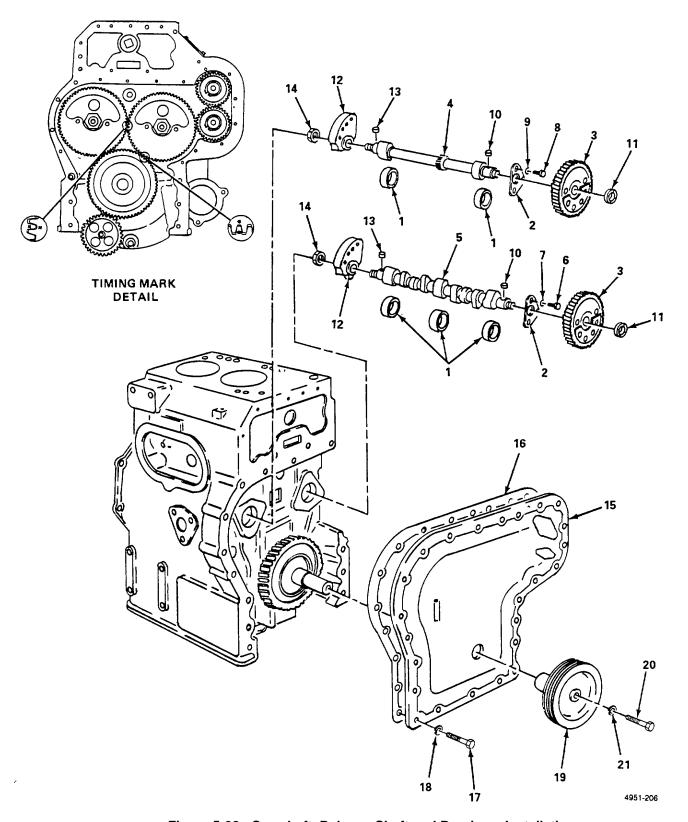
Camshaft, Balance Shaft and Bearings, Installation.
